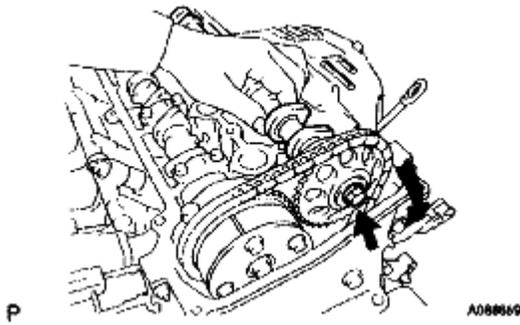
Removing Camshaft Timing Sprocket And Timing Chain
